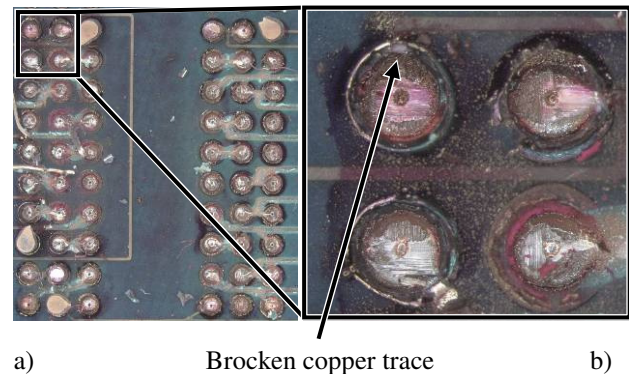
Dye and pry test results of a VFBGA-60 package, a) Complete ball-out; b) Ball-out section with broken copper trace at a lifted PCB pad
